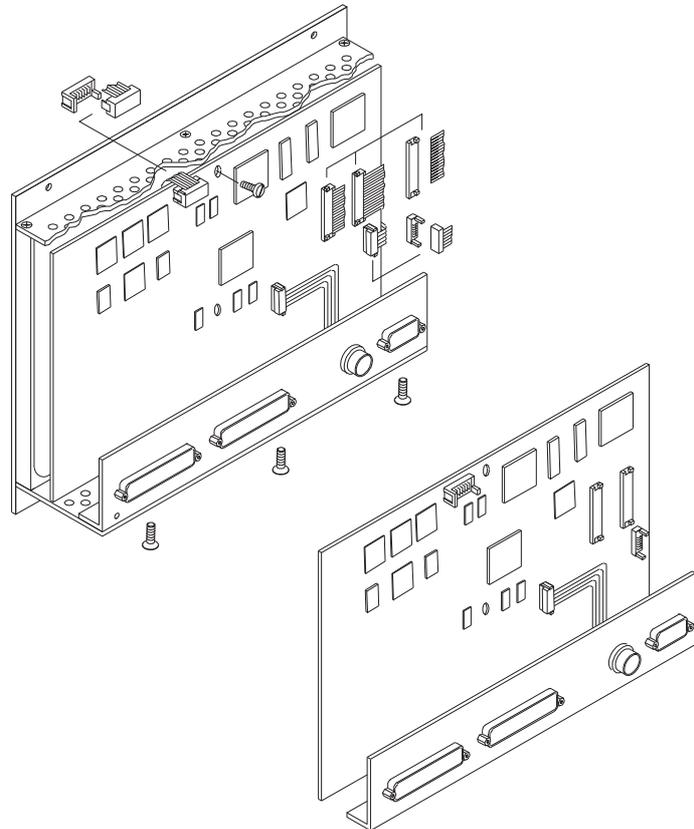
Loosening flat cables and removing mounting unit of main pcb and connector panel
